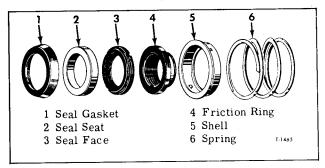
Hydraulic Pump and Motor Shaft Seal Components
